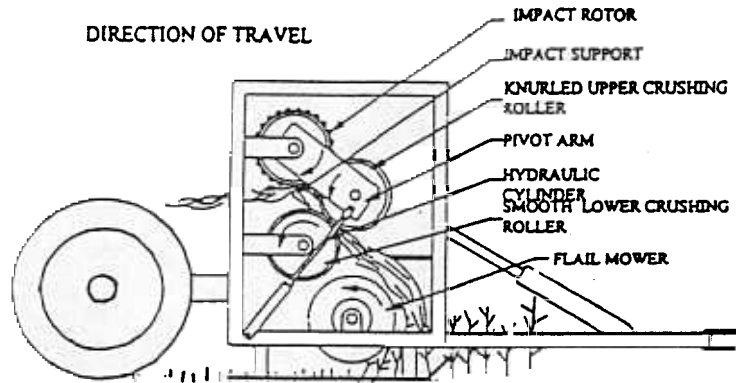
Schematic of Crushing-Impact Macerator with Flail Mower.
